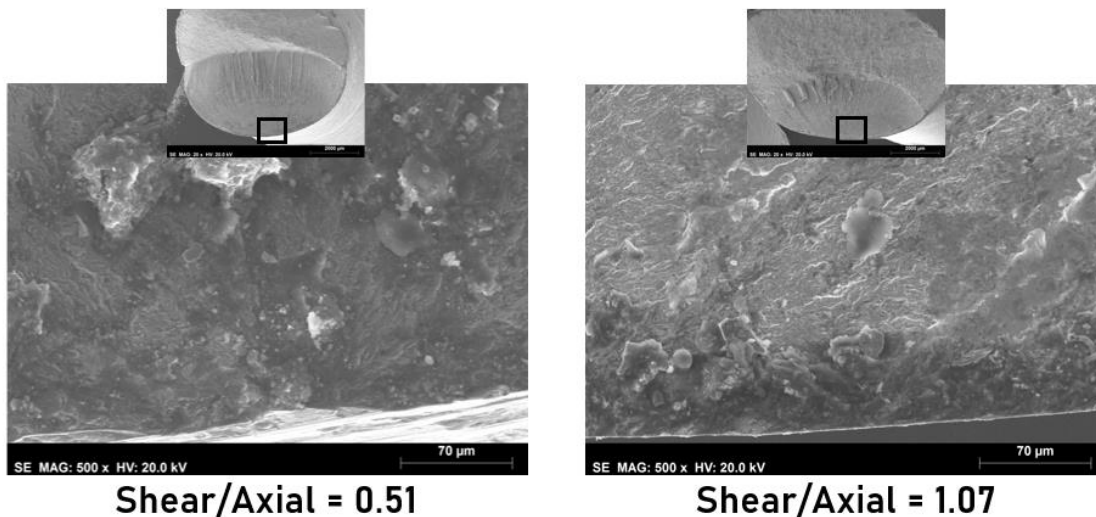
Fatigue crack initiation morphology in two different shear /axial stress ratio specimens.
